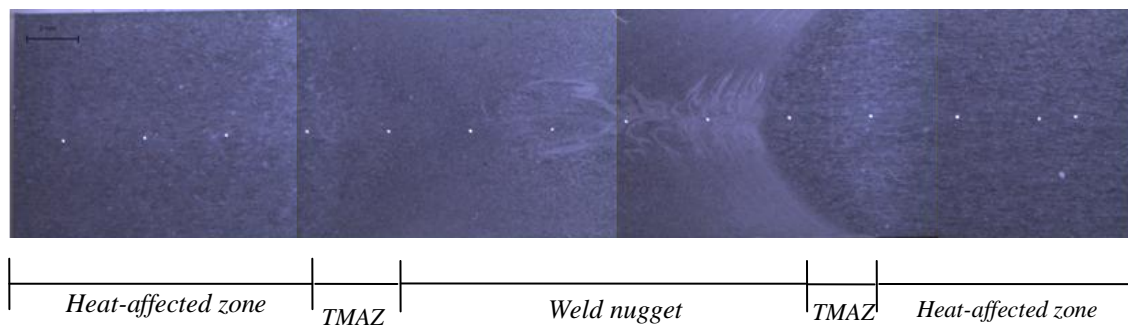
Self-reacting friction stir weld zones. The weld nugget, the thermo-mechanically affected zone (TMAZ), and the heat-affected zone are presented on the macrograph. The advancing side is shown on the right side of the macrograph.
